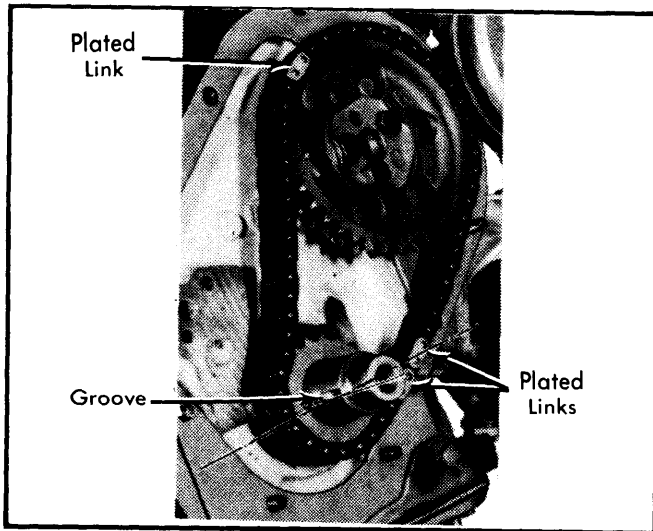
Proper Alignment of Camshaft and Crankshaft for Removing Timing Chain
